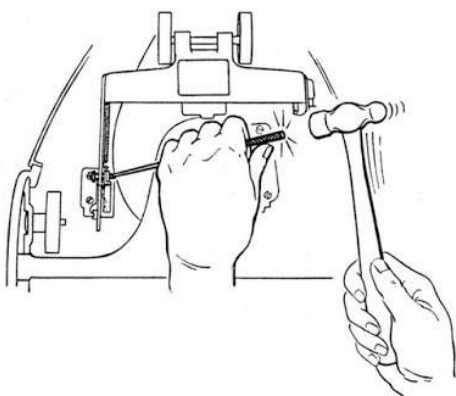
Sketch showing use of chisel to stake the thread of the tilting bar bolt. Model 25
